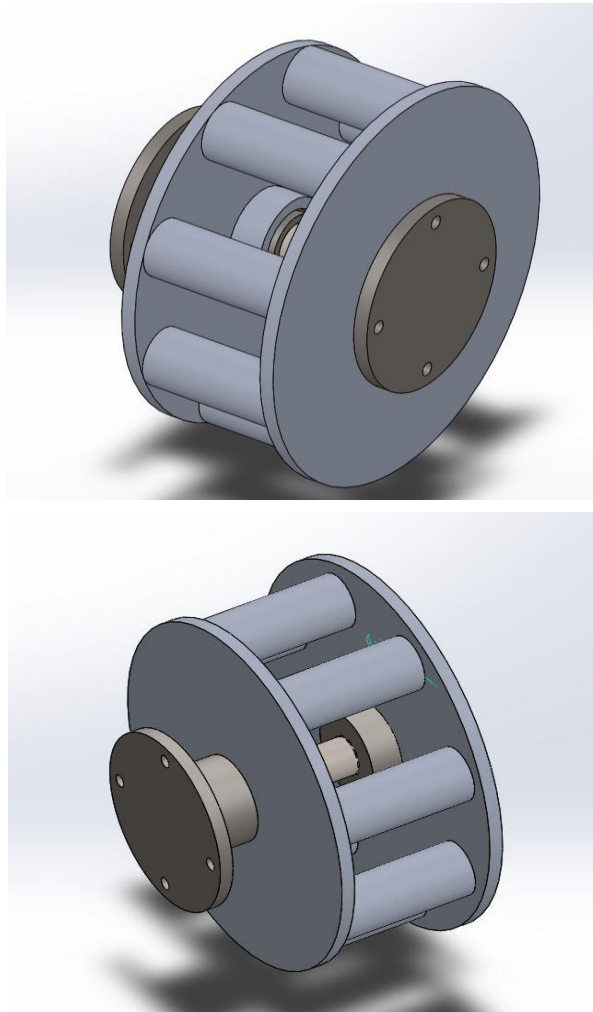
9 Assembly of Single stator-rotor of electromagnetic retarder
